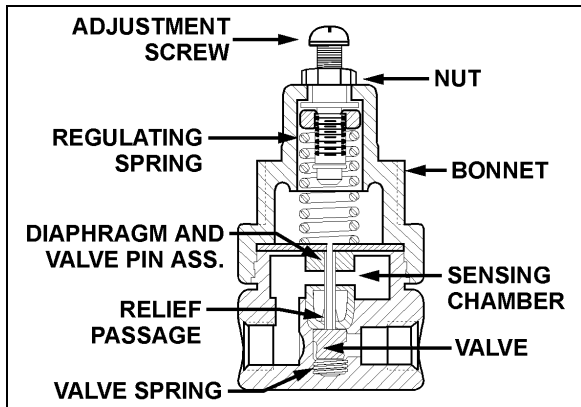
AIR PRESSURE REGULATING VALVE 12141A
